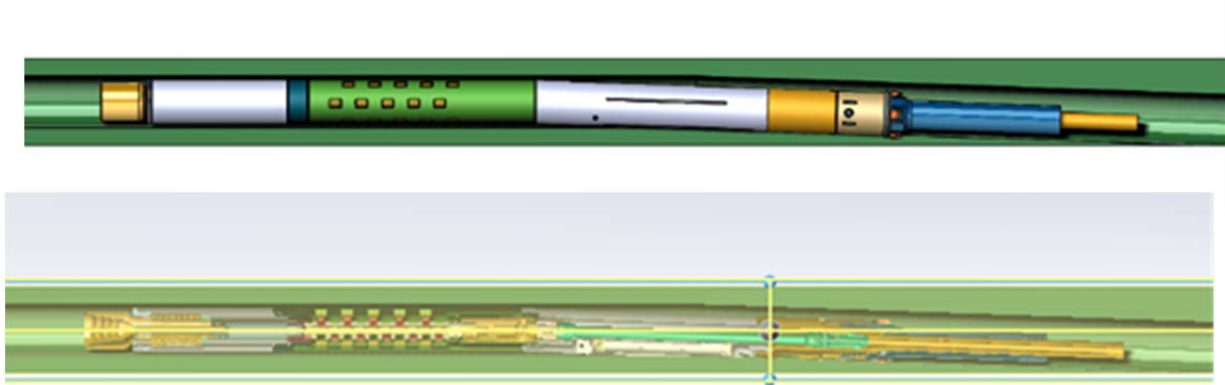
Views of the source as built. As shown, the source section contains 10 sets of 2 hammers each, striking three anvils per revolution. The inner drive rod spins the axis with hammers installed which rotate and strike anvils welded into the outer rod. If more energy is required, a second section of 10 hammer sets can be added for a total of 20 hammer sets.
